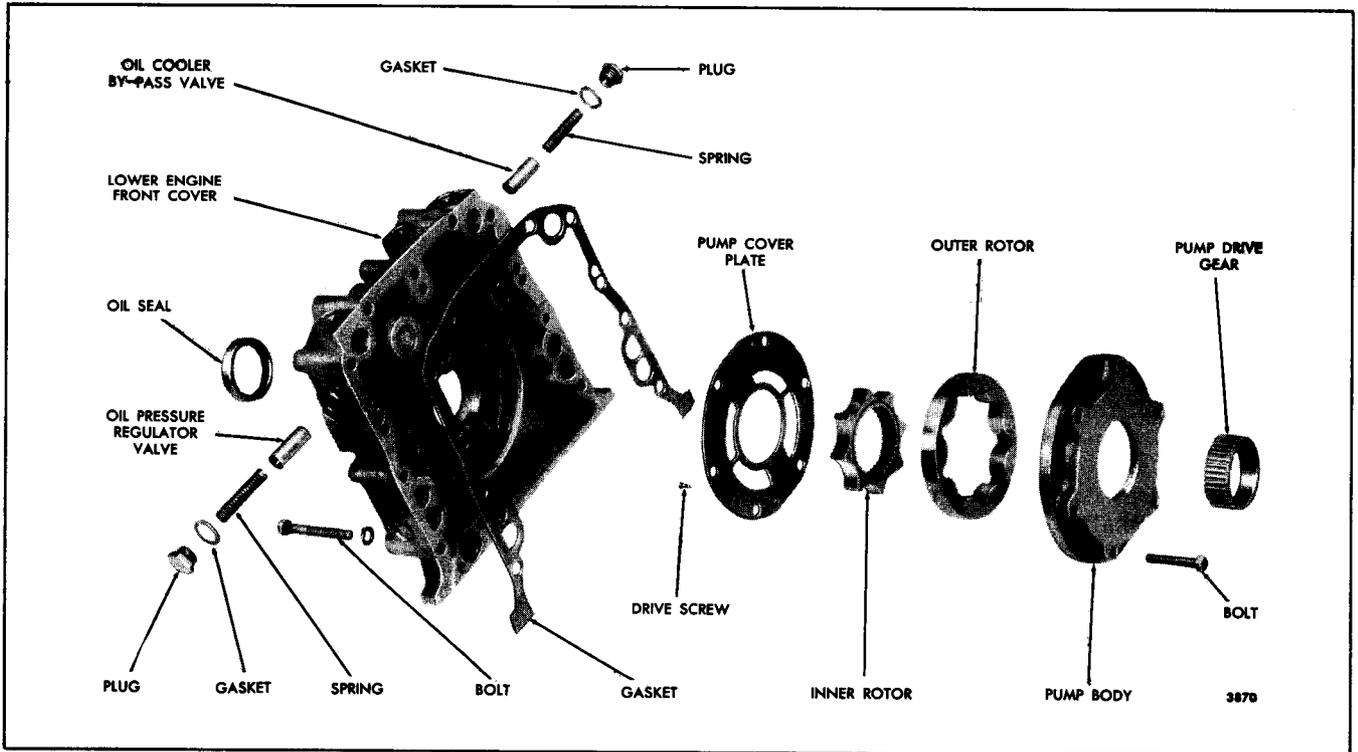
Oil Pump Details and Relative Location of Parts (Current)
